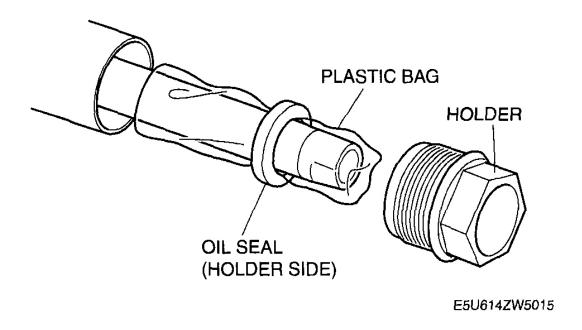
Identifying Oil Seal (Holder Side), Plastic Bag And Holder Courtesy of MAZDA MOTORS CORP.
